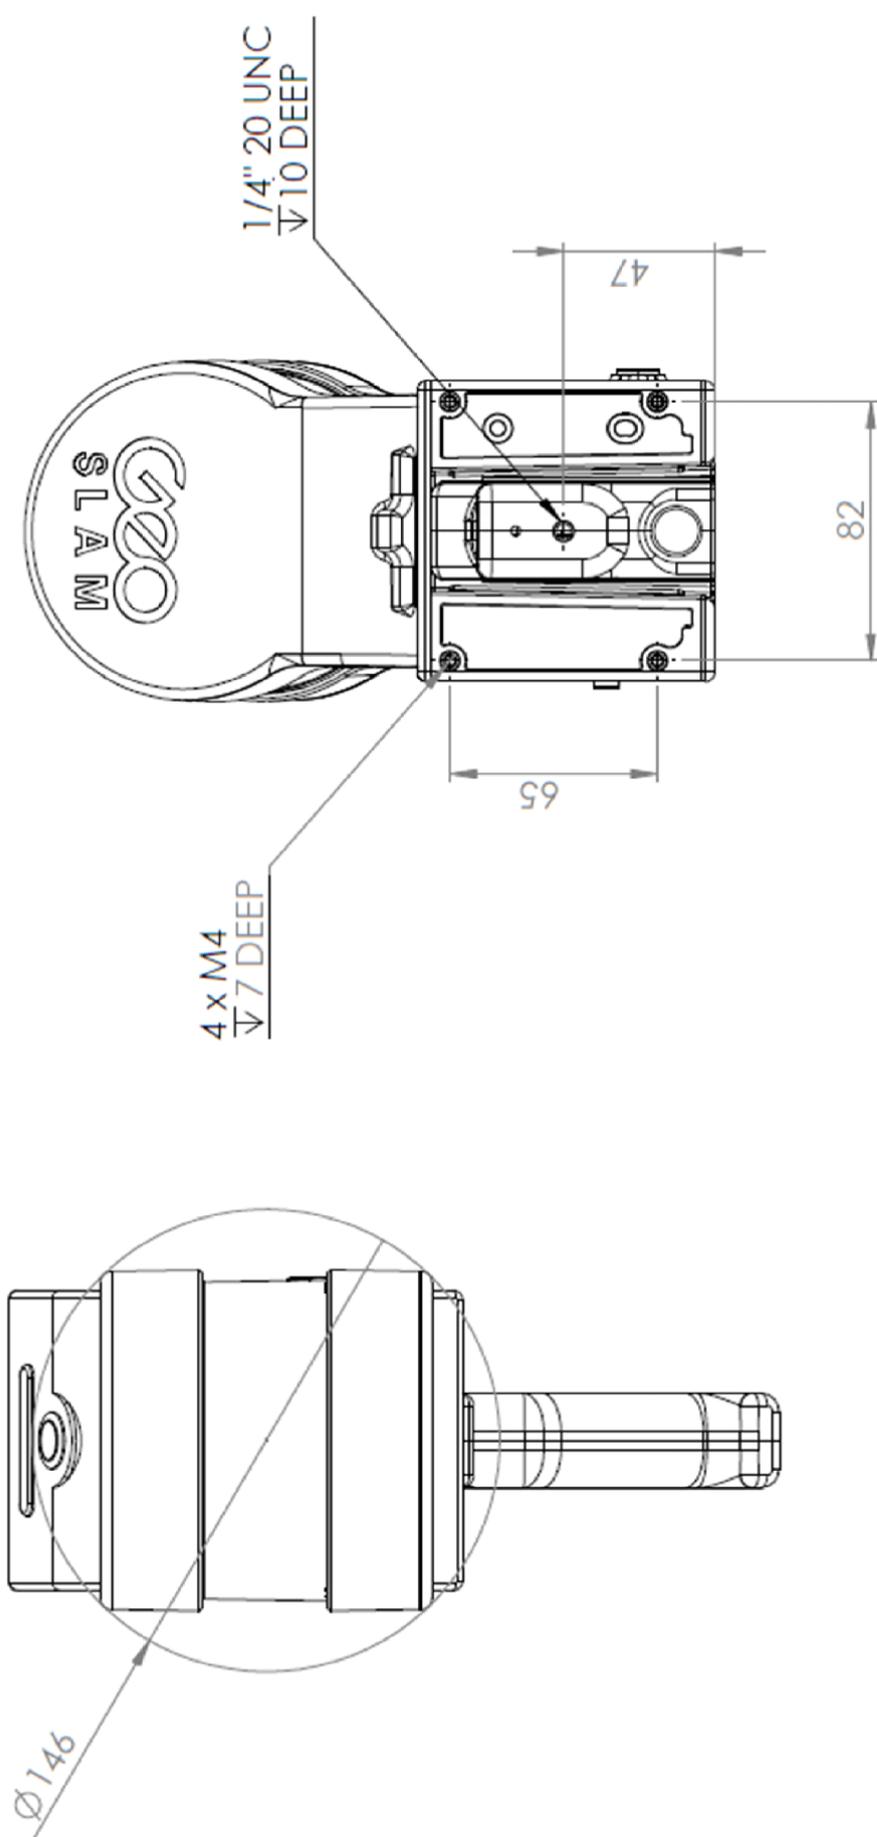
Dimensional drawings with optional mounting plate on bottom face
